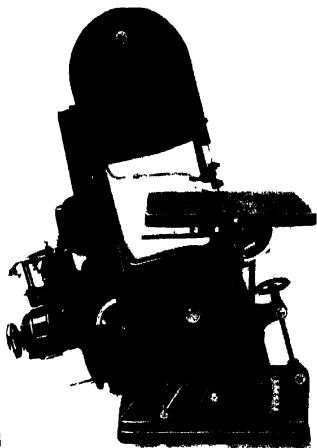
Hand band-sawing machine—set up for cutting at an angle (By permission, E. H. Jones (Machine Tools), Ltd.)
